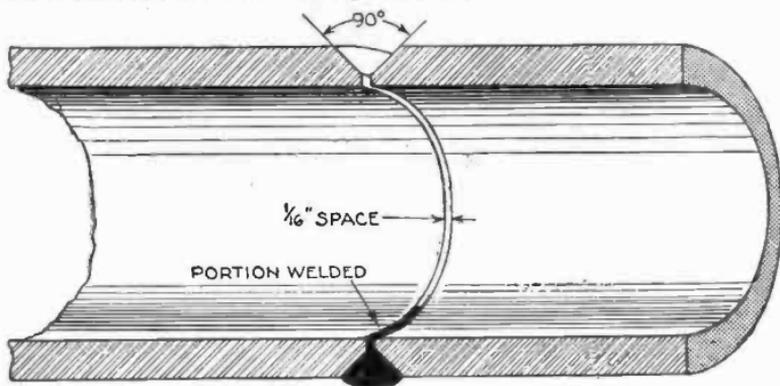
,190.—Placement of pipes for butt weld joint. The ends of the pipes should be chamfered  $45^\circ$  making a  $90^\circ$  V for the weld. The ends must be not less than  $\frac{1}{16}$  in. apart in order to secure thorough penetration of the weld. The welding rod or wire should be as near as possible the same carbon content as the material in the pipes. The weld should be built up as rapidly as the molten metal can be handled without overlapping and in a continuous operation all around the pipe. If the welding flame be slowly moved over the first part welded for a few inches, the weld is automatically and homogeneously annealed for all practical purposes.
